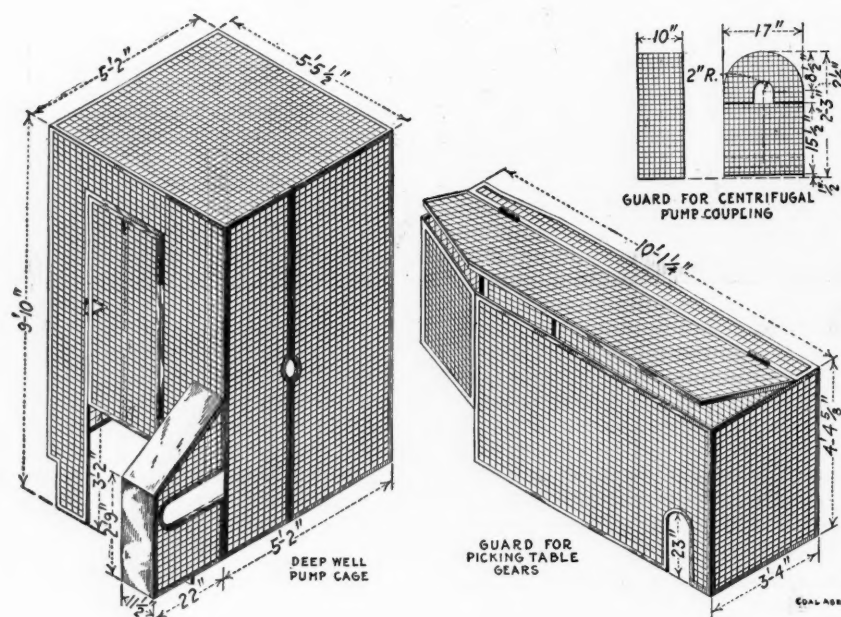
GUARDS FOR A DEEP-WELL PUMP, PICKING-TABLE GEARS AND A PUMP COUPLING
